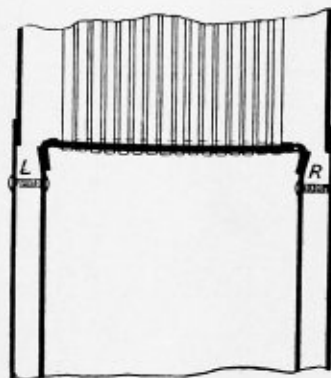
DISTORTION AND ENLARGEMENT OF TUBE PLATE
